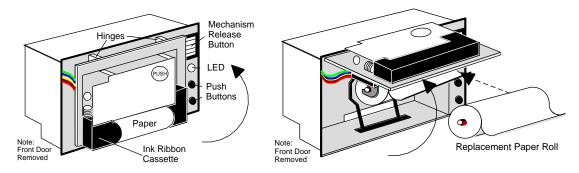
Head Mechanism Rotation and Paper Roll Removal / Insertion
